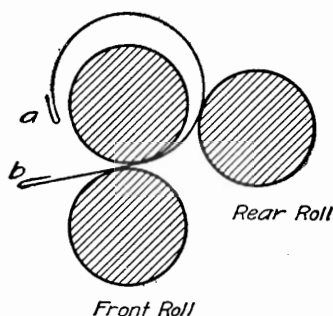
Position of Sheet When Cylinder Is Nearly Formed.
